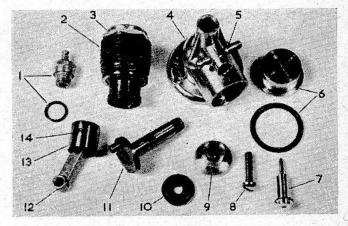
The parts of a typical small glowplug engine. 1—glowplug and washer, 2—cylinder, 3—cylinder-head, 4—crankcase, 5 carburettor spraybar, 6—crankcase backplate and gasket, 7 needle-valve, 8—propeller screw, 9—prop drive hub, 10—prop washer, 11—crankshaft, 12—connecting-rod, 13—piston, 14 gudgeon-pin.
